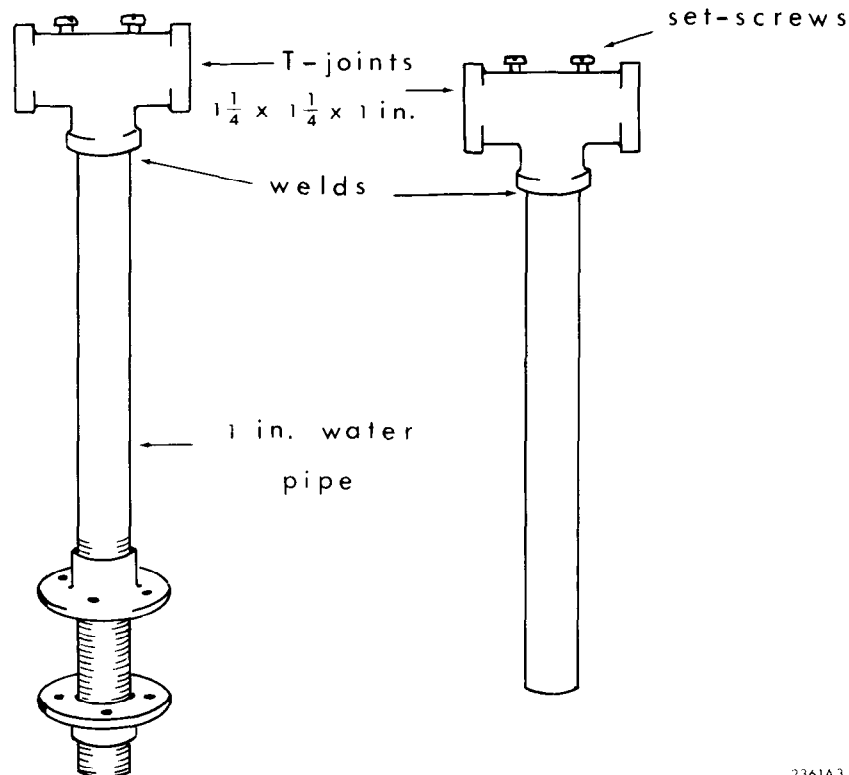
Diagram of jointed-jigs for clamping bones in the mock-up display.
